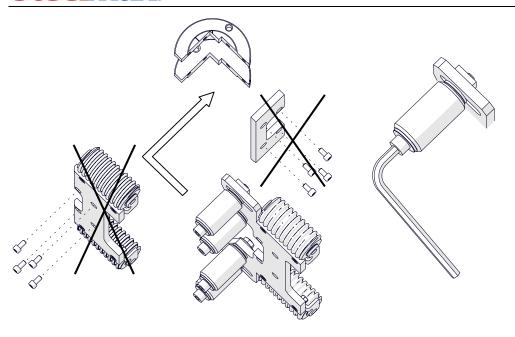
Assembling the guide set for round plates; loosening the outer rollers
